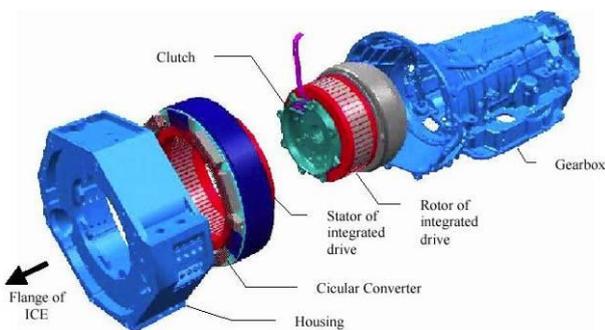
Integrated inverter motor for a hybrid car in P2 configuration [2]
